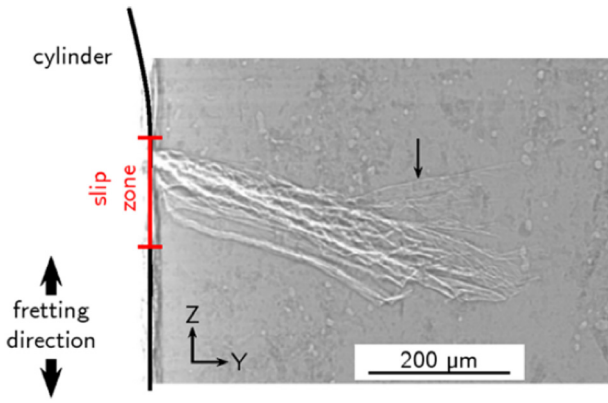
An example of a 2D radiography showing a fretting fatigue crack [122].
